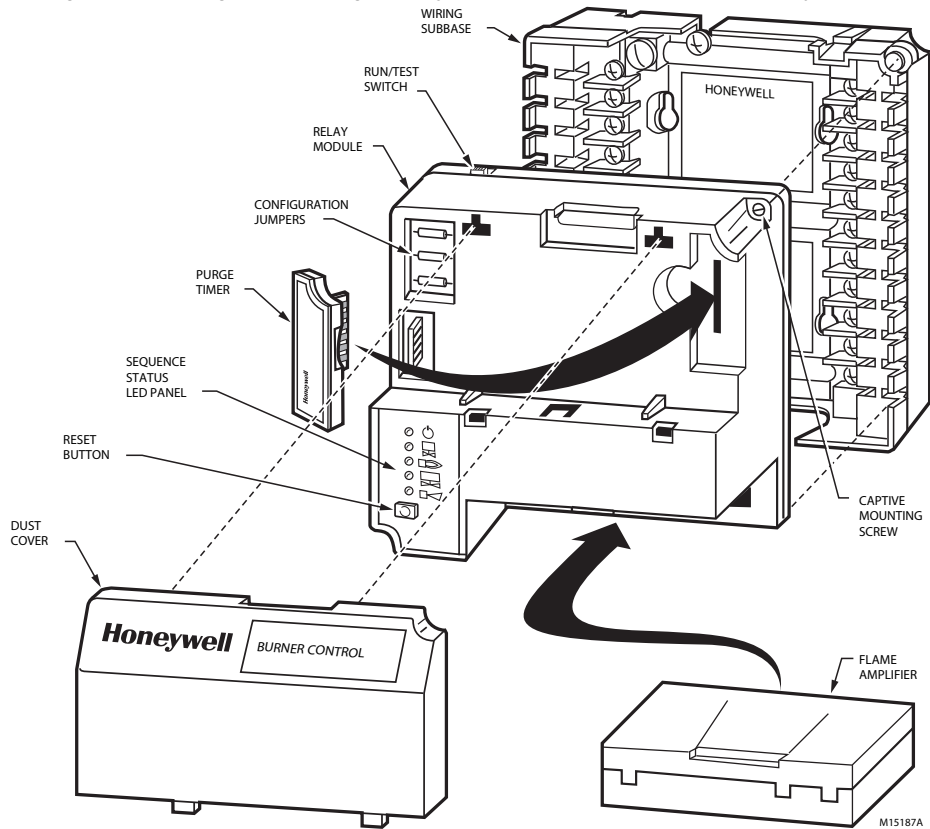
EC/RM7830A and EC/RM7850A Relay Modules exploded view.
